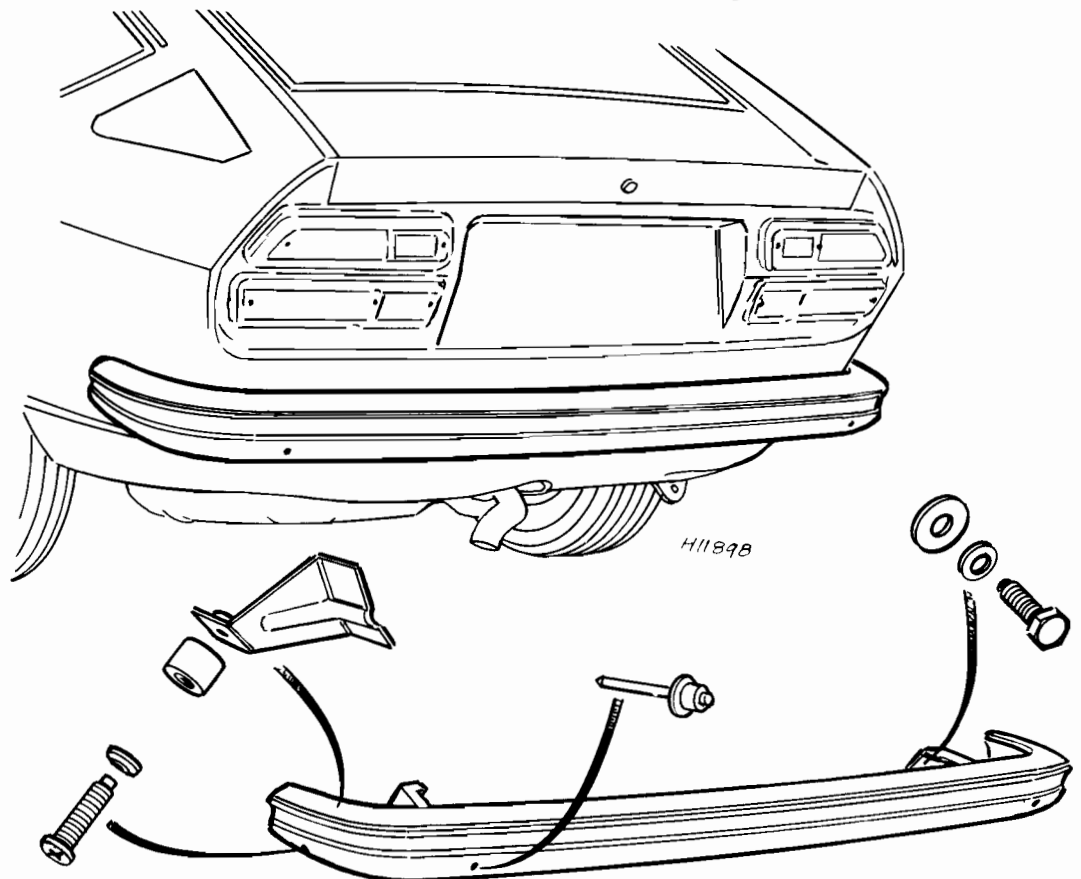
Rear bumper (non-impact absorbing) (Sec 9)
